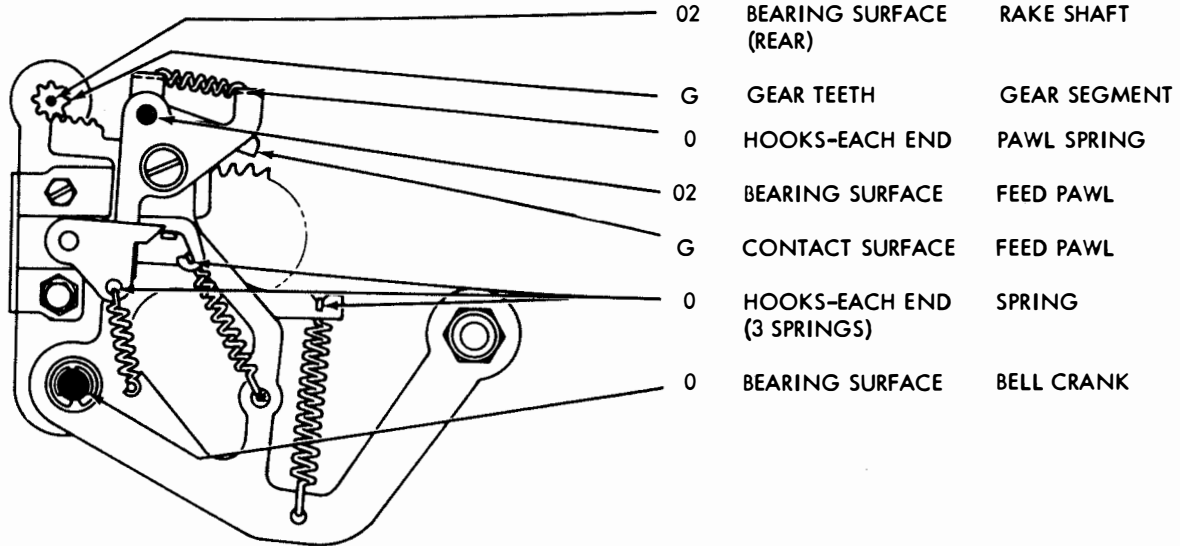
Printing and Rocker Bail Mechanisms Lubrication
